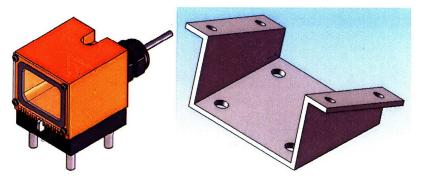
Camera casing system<sup>3</sup> and mounting bracket
